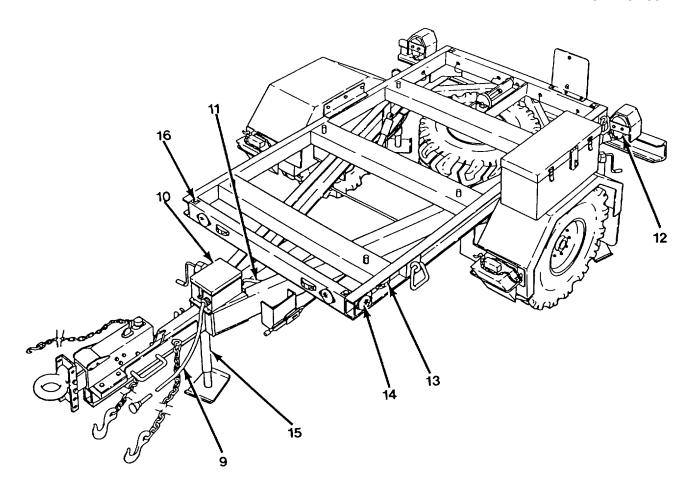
Servicing Unit Body Assembly. (Sheet 2)
